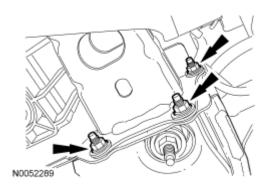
Locating LH Subframe-To-Lower Bumper Nuts Courtesy of FORD MOTOR CO.
